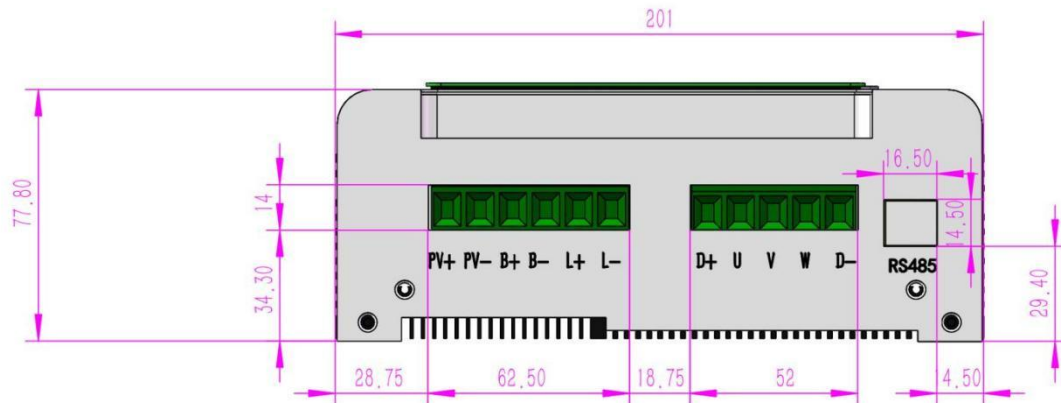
Controller installation dimensions 1 (Unit: mm)
